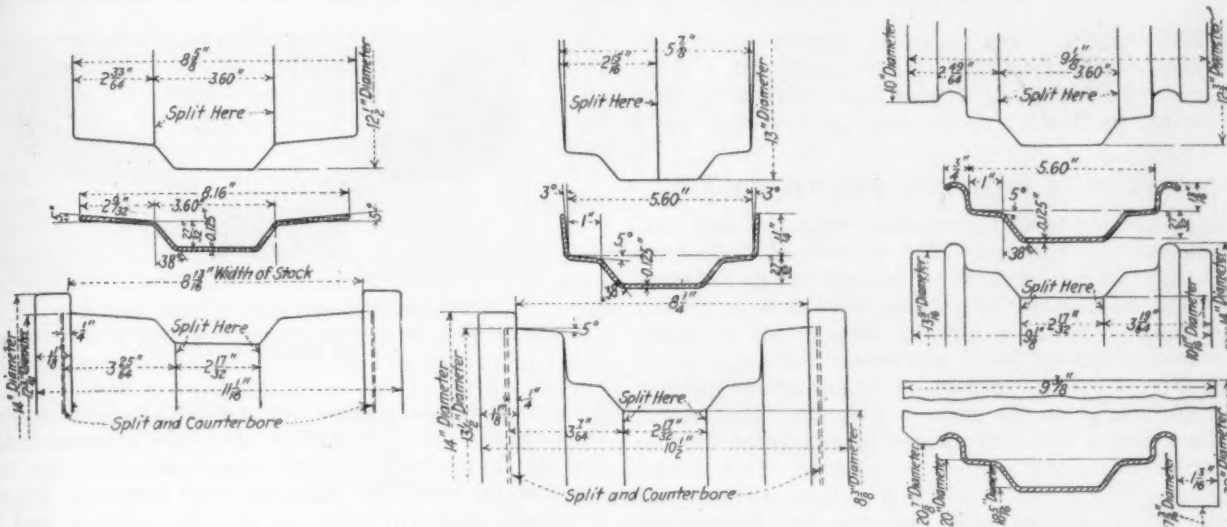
DROP-CENTER-RIM MANUFACTURE
